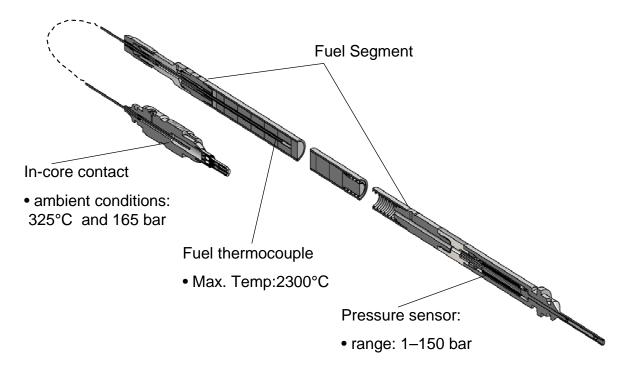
Cut out view of re-instrumented fuel rod showing placement of fuel centre thermocouple and internal rod pressure sensor.
